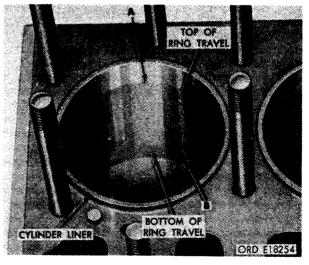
POINTS OF MEASUREMENT FOR CHECKING CYLINDER LINER BORES.
